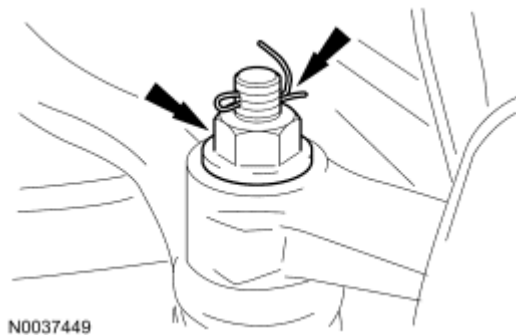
Locating Tie-Rod Ends Nuts And Cotter Pin
